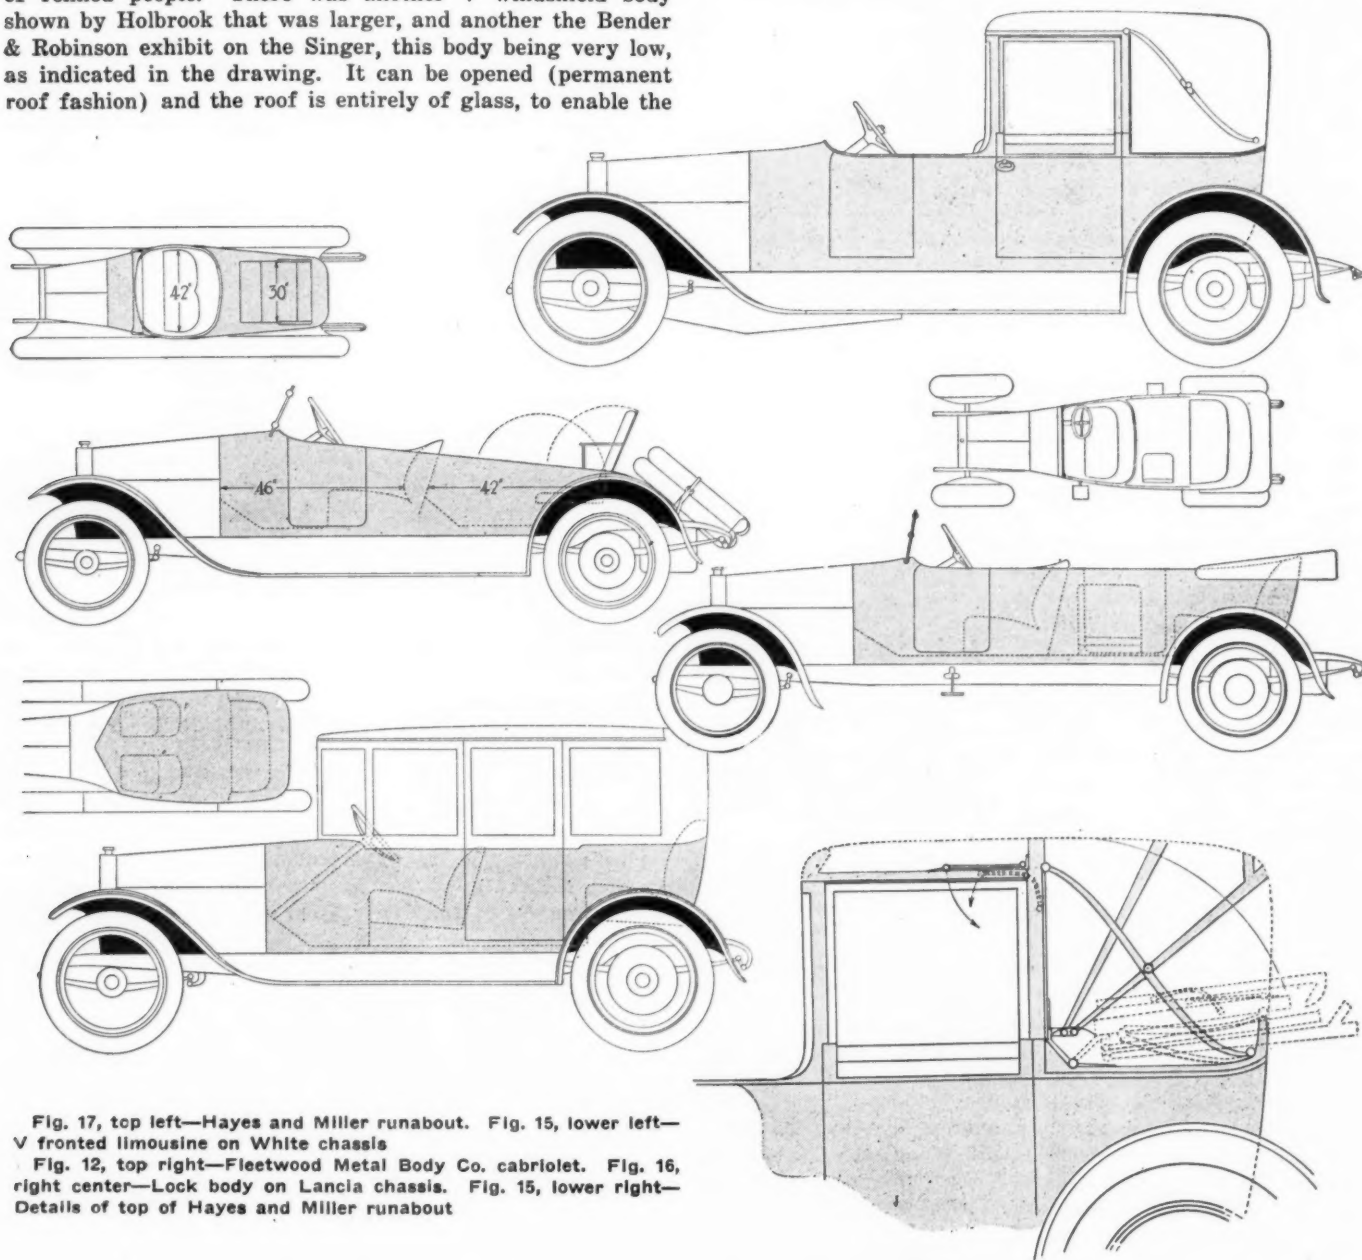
, top left—Hayes and Miller runabout. Fig. 15, lower left—V fronted limousine on White chassis. Fig. 12, top right—Fleetwood Metal Body Co. cabriolet. Fig. 16, right center—Lock body on Lancia chassis. Fig. 15, lower right—Details of top of Hayes and Miller runabout
